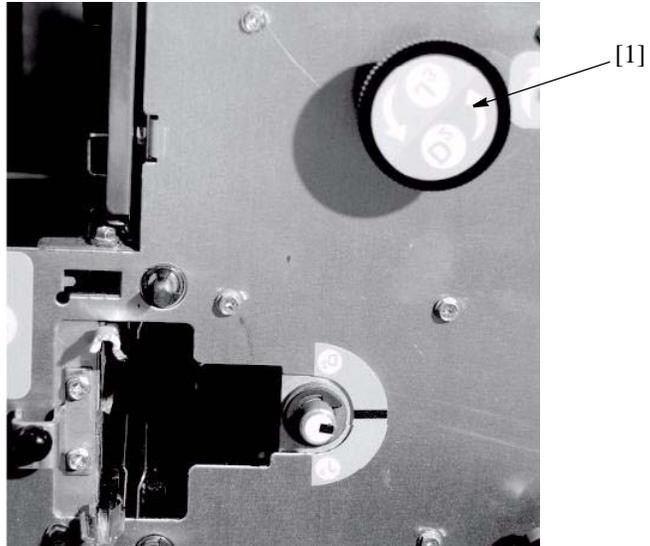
Removing the Punch Cycle Knob on the Front Panel.
